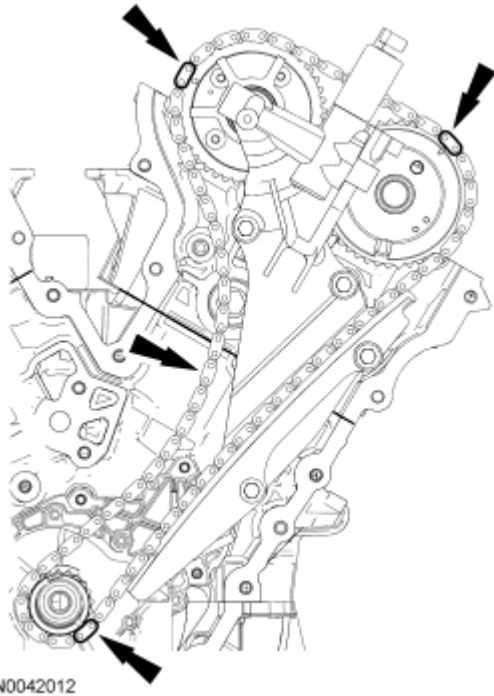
Aligning Marks On Timing Chain With Marks On Camshaft And Crankshaft Sprockets
